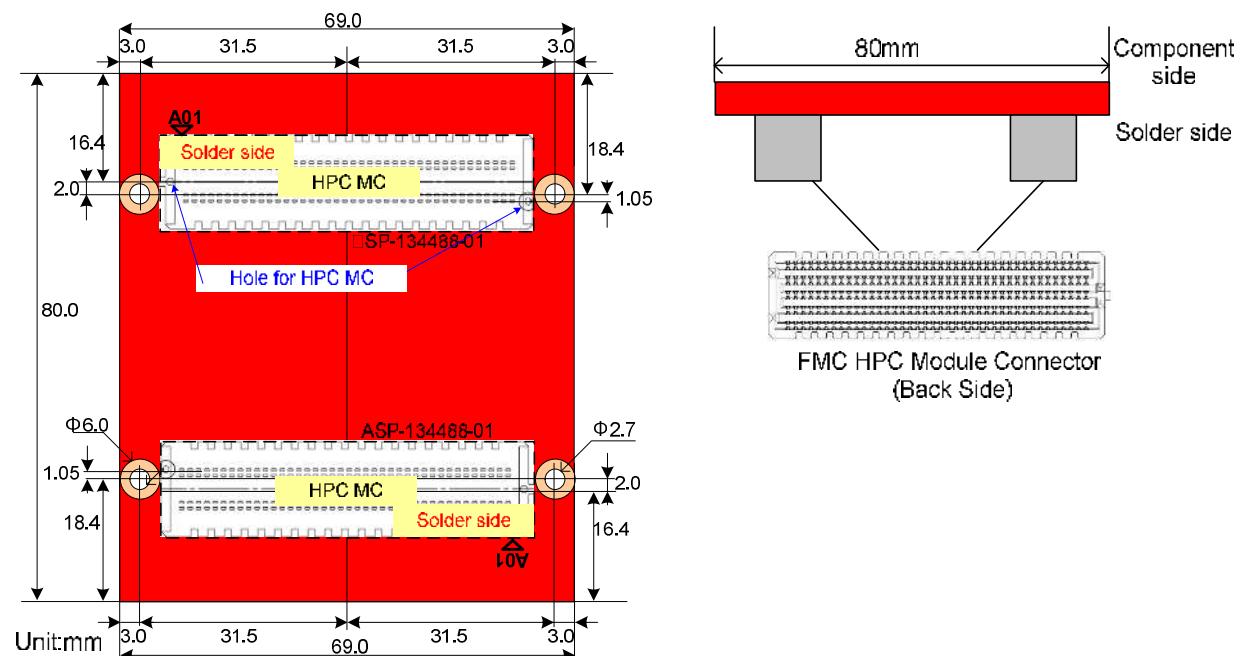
Layout of the TB-FMCH-CONNECTER Board Components
